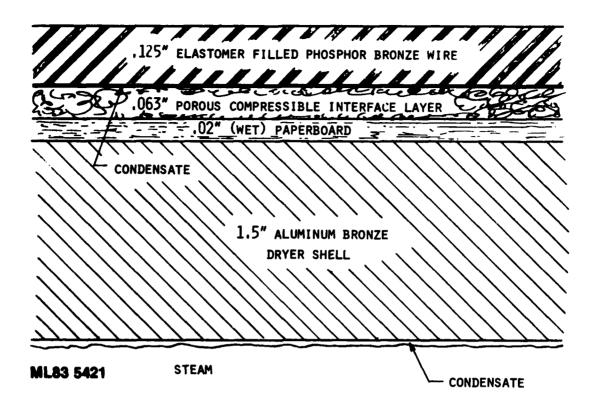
Cross section of dryer shell, paperboard, and cold belt.
